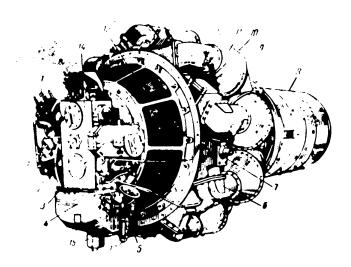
Over all View of a Jet Engine tent Centrifugal Compressor
